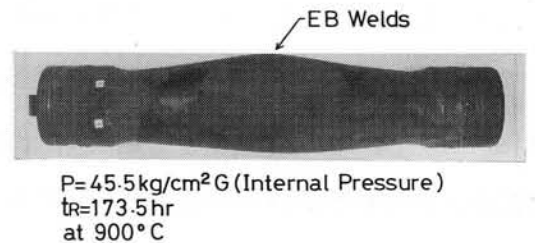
Biaxial Creep Rupture Specimen With Circumferential Electron Beam Weld Joint of Hastelloy X (HAEM)
